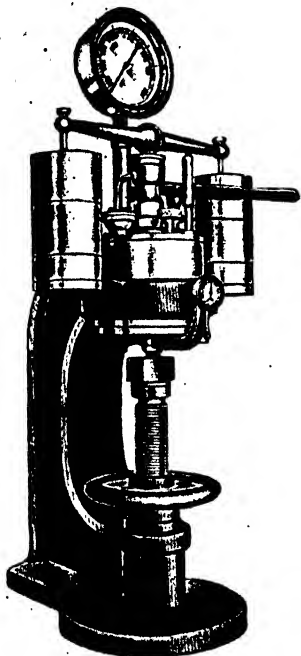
Brinell hardness-testing machine (Burrell Technical Supply Co.).
